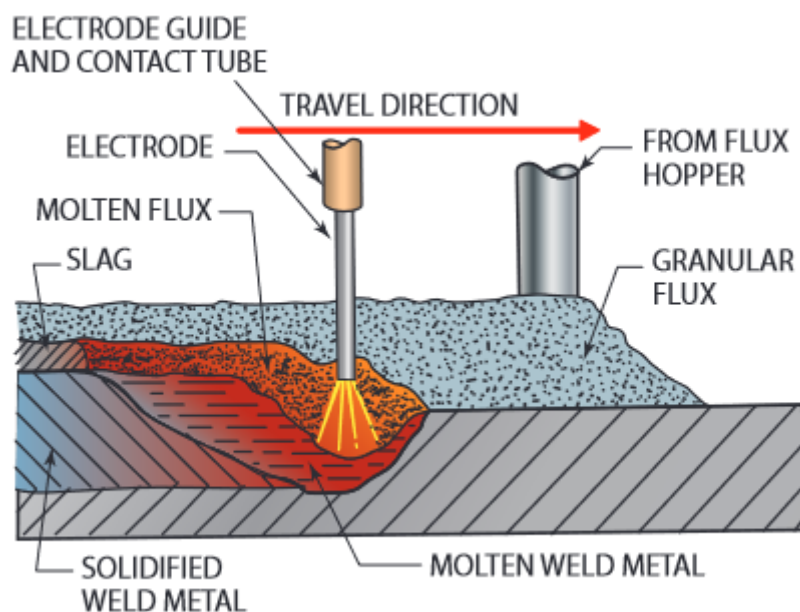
The schematic representation of the Submerged Arc Welding process [16]
